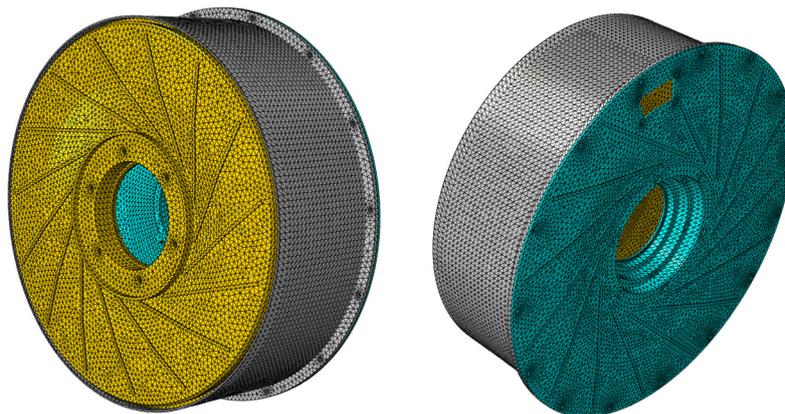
FE-model of the whole rotor of the electric wheel hub motor
